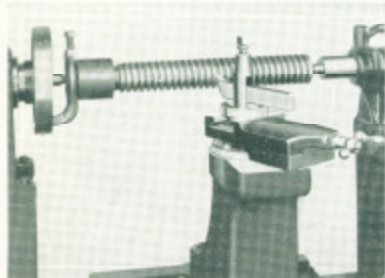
Cutting a coarse thread on a jack screw on the No. 2 Brake Drum Lathe.
